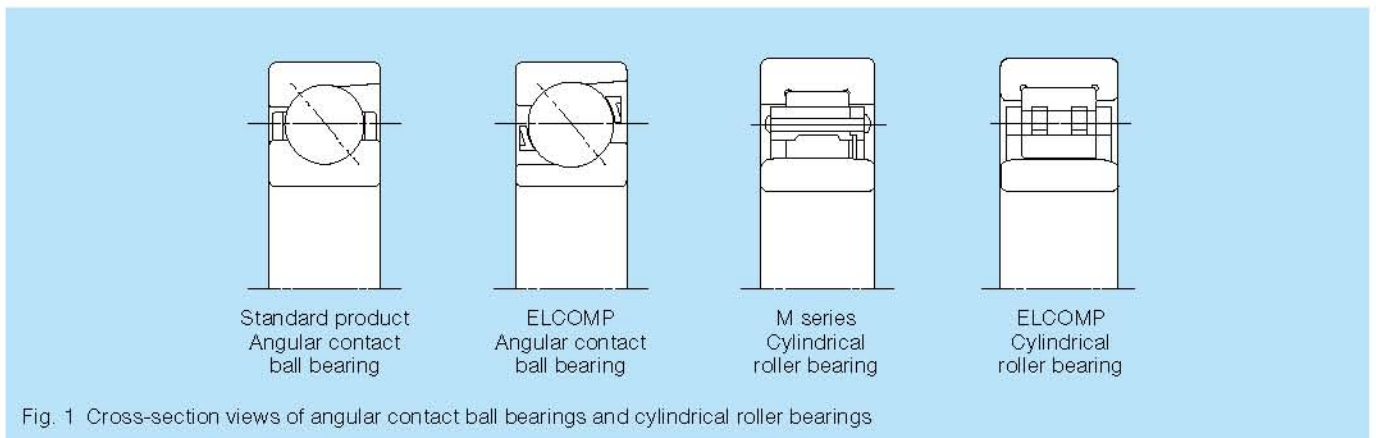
Cross-section views of angular contact ball bearings and cylindrical roller bearings
